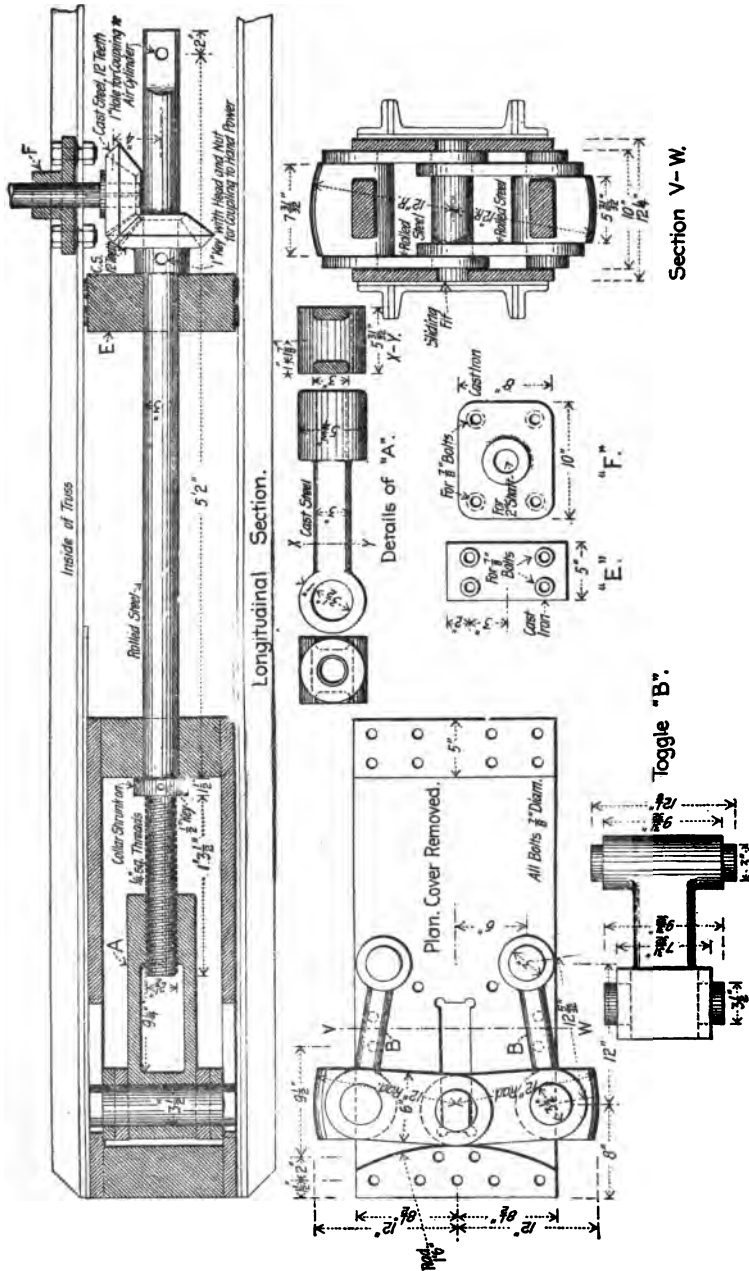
DETAILS OF MACHINERY OF END-LOCK.
